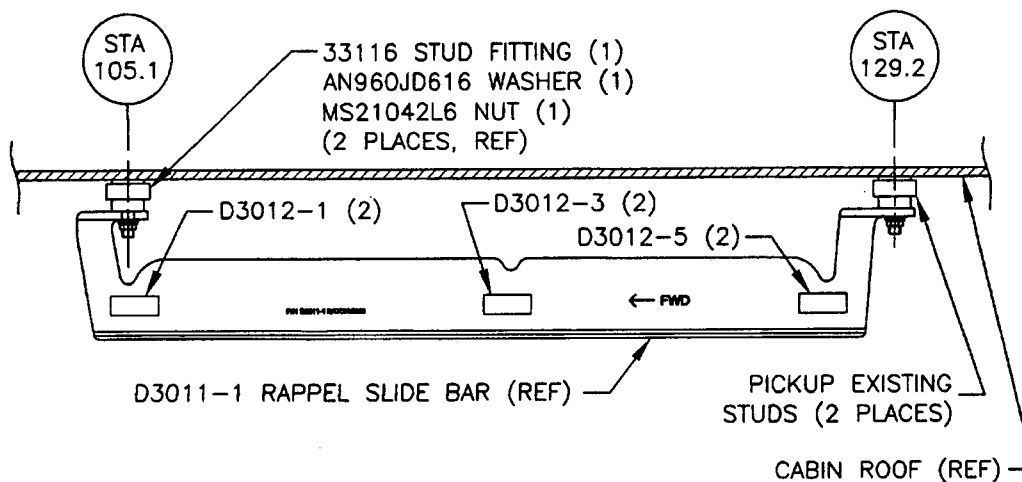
Installation of D205-523-043 Slide Bar Assembly
